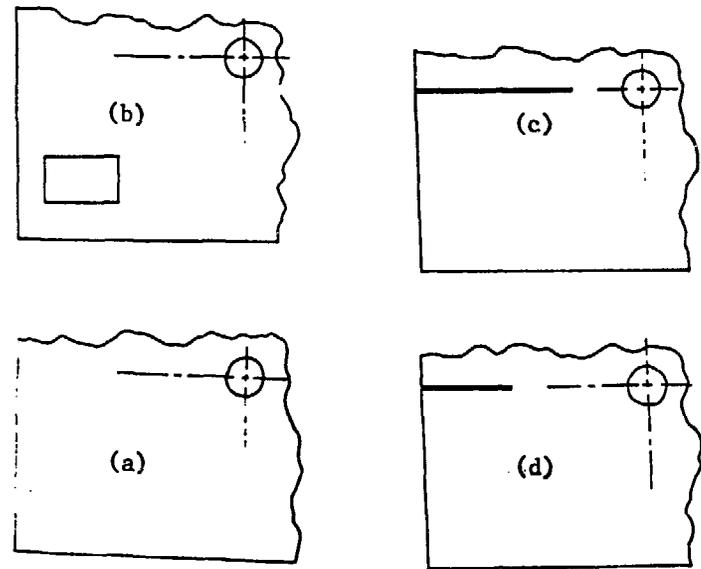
FELIX aluminum flat-plate test pieces. (a) solid plate, (b) plate with rectangular hole in each corner, (c) and (d) plates with slits.
